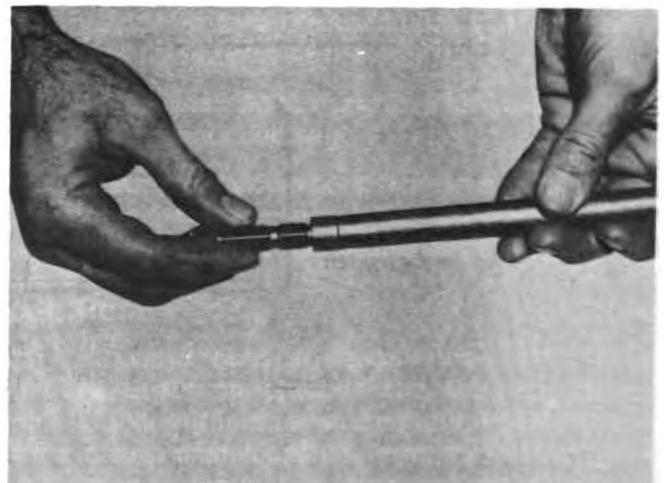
(N20310). Check The Socket End Of The Push Rods.
